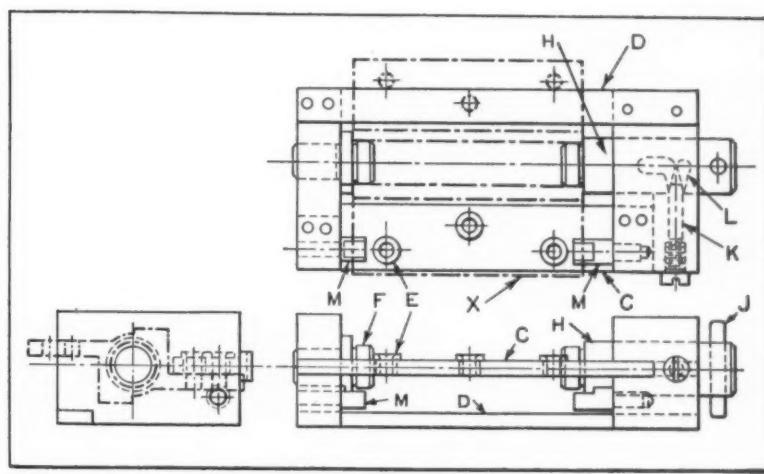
Jig Employed for Drilling Piece *W*, Fig. 1, in Two Settings
